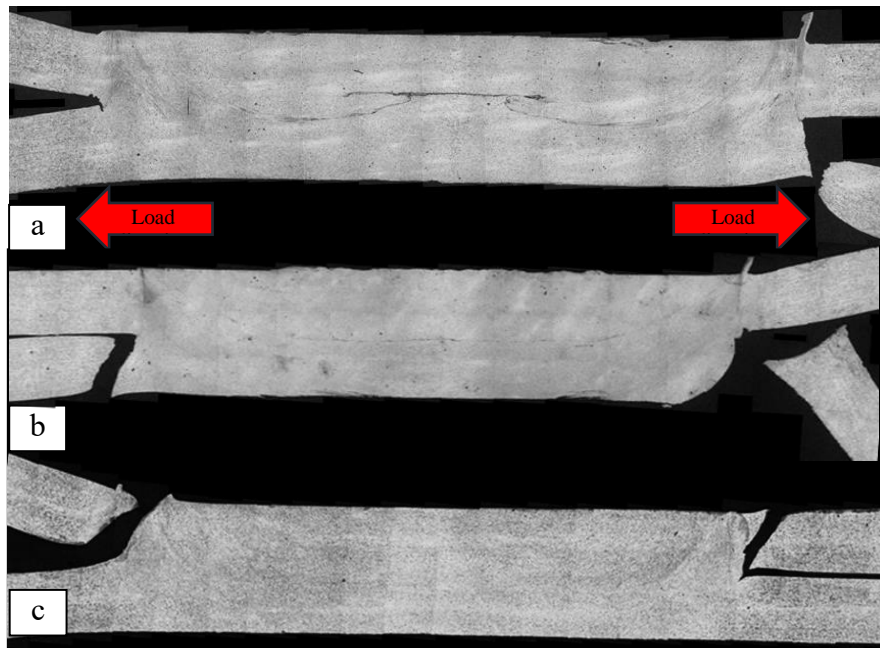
Macroscopic cross-sections through the weld centre lines for fractured samples: (a) in the as-welded condition (2.0 s, 2000 rpm, and 1.0 mm); (b) naturally aged for 30 days (0.55 s, 2000 rpm, and 1.0 mm); and (c) artificially aged at 180 °C for 30 min. (2.0 s, 2000 rpm, 1.0 mm).
